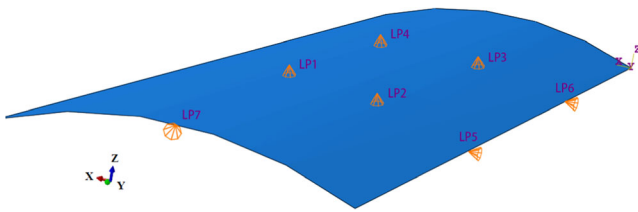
The initial “4-2-1” fixture locating layout for the sheet metal case
